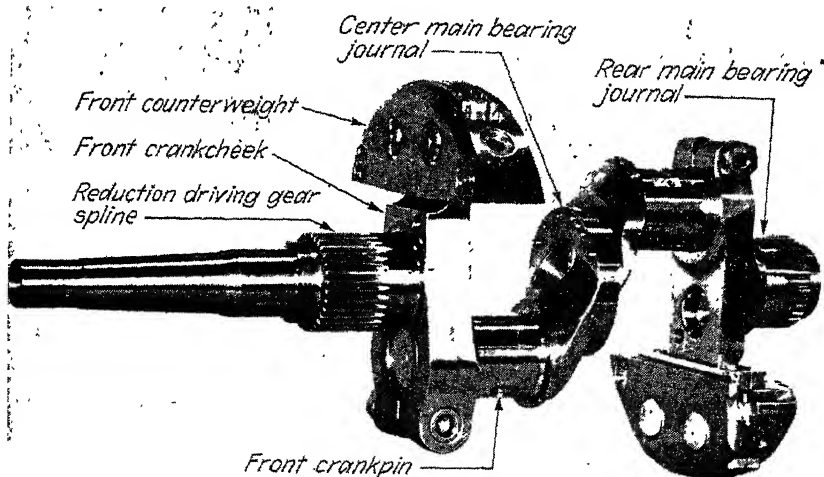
Crankshaft for a twin-row radial engine. (Wright Aeronautical Corp.)
